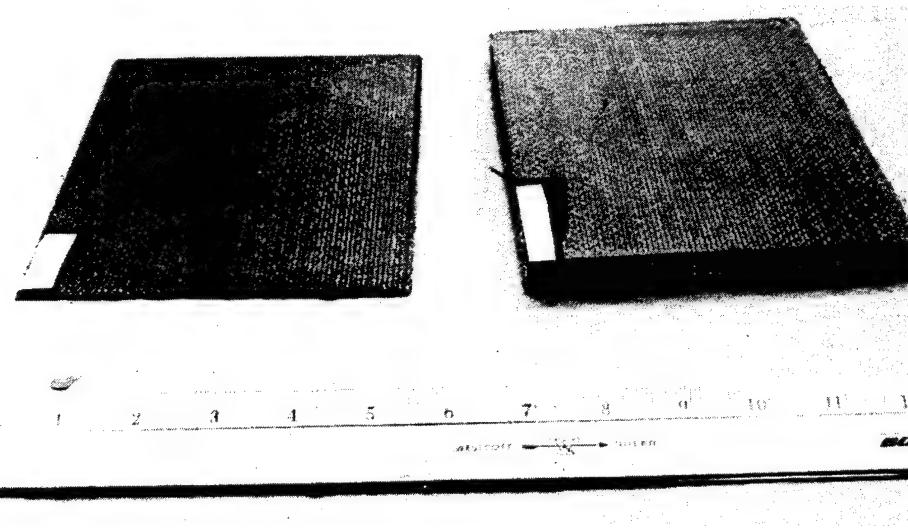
Nondestructive Inspection Standards for Test Technique Evaluation
